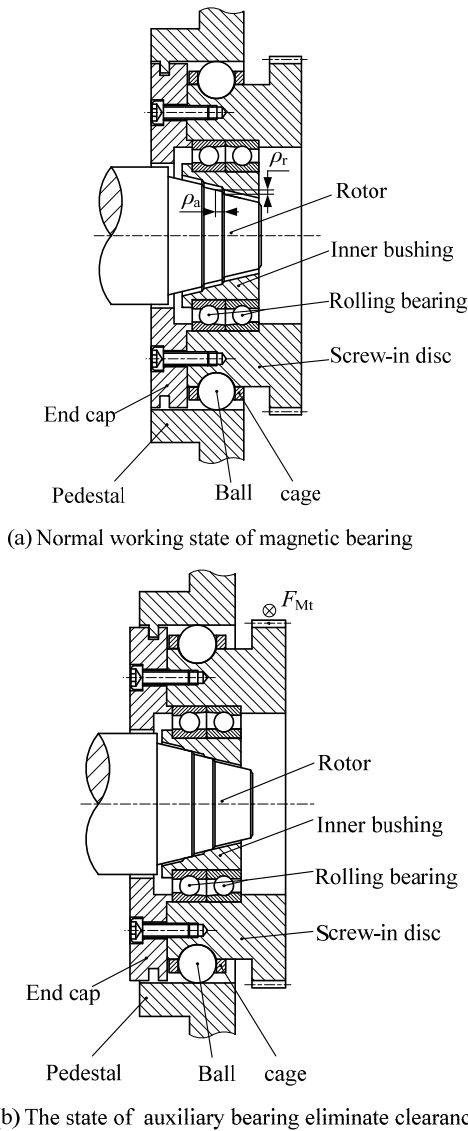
Radial and Axial Integrated Auxiliary Bearing Device Concept Sketch
